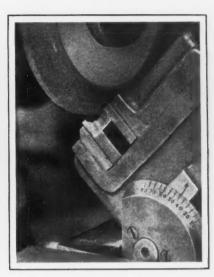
Grinding a 45-degree Edge on a Formed Tool
